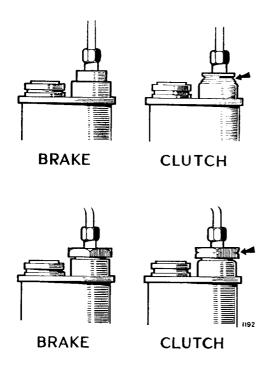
A clutch master cylinder can be distinguished from a brake master cylinder by the groove around the end cap.
